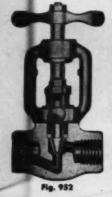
SERIES—A drop forgad, instead of ber stock, steel valve for gage, meter, dead-and, instrument and other small lines, and for pumps, vents, Diesel and gas engines, etc. Long taper semi-needle type stem-disk for close regulation and tight seating. Fig. 152 series has carbon steel body with Yalloy 13% chrome stemidisk, fig. 2152 series, all 18-8 stainless steel.
